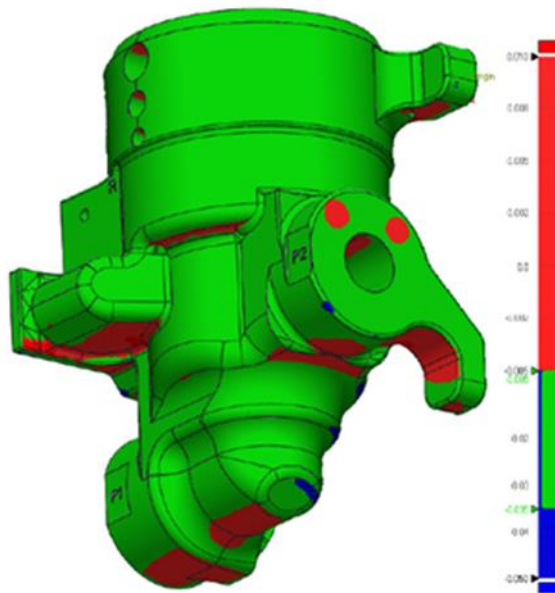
L-PBF PN 48992 to CAD Post-Chemical Milling
